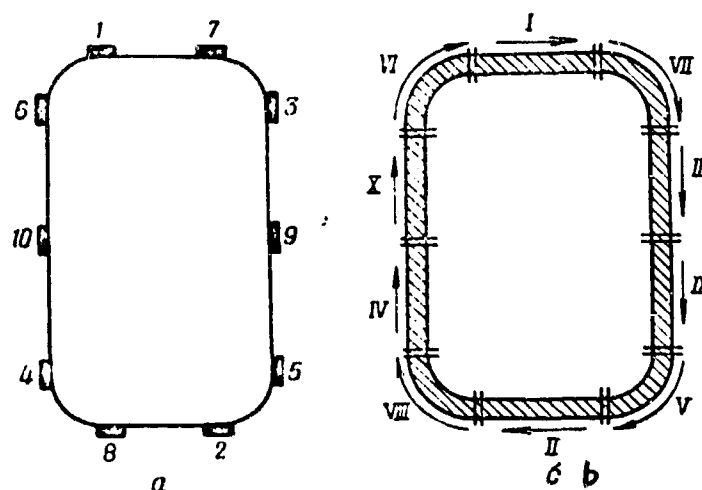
Sequence of Tack-Welding and Welding of Rectangular Patch to Ship Hull: a- sequence of tack-welding; b- sequence and direction of welding; 1 - 10 = sequence of tack-welding; and I - X = sequence of welding; the arrows indicate the direction of welding.
